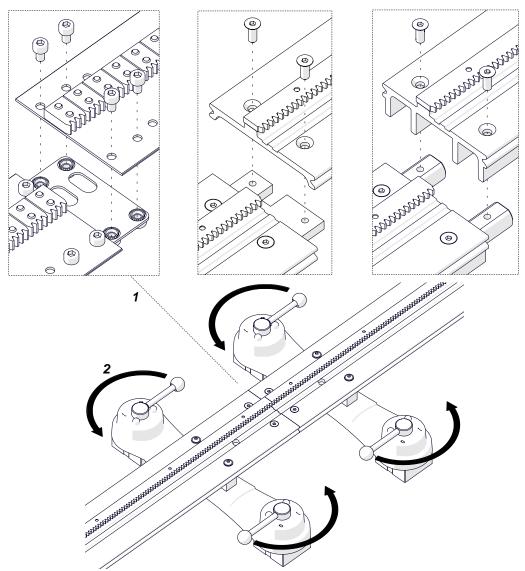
Connecting the rails and clamping the magnetic units to the surface
